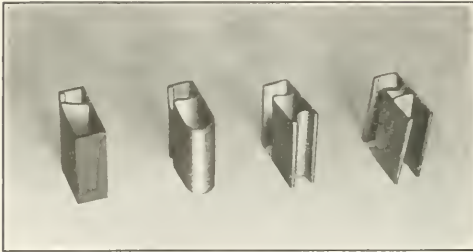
Sections of Sheet-metal Molding formed by rolling
